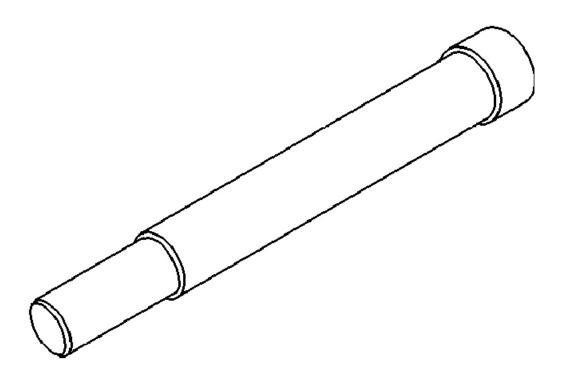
Crankshaft Damper Remover Insert 8194 Courtesy of CHRYSLER LLC
